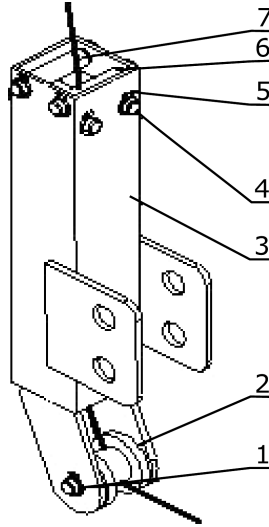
The structure of the seed rope laying device: 1 – guide-line wheel axis, 2 – guide-line wheel, 3 – guide-line body, 4 – rotating tube axis, 5 – ring, 6 – rotating tube, 7 – seed rope.
